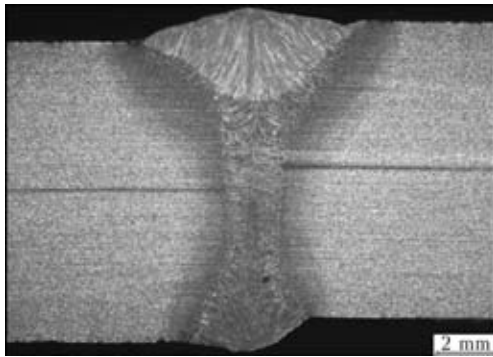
Macrosection of welded joint at misalignment of edges of 1 mm
